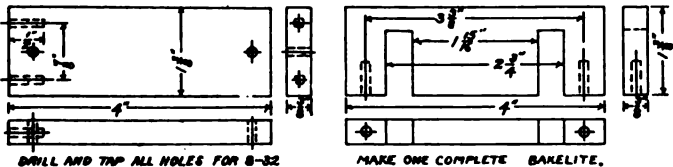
Dimensions of Bracket for Mounting Honeycomb Coil.
